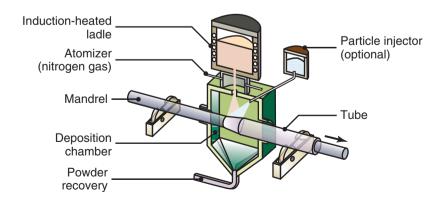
Spray deposition (*Osprey process*) in which molten metal is sprayed over a rotating mandrel to produce seamless tubing and pipe.
